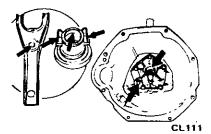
Lubricating points of withdrawal lever and front cover
